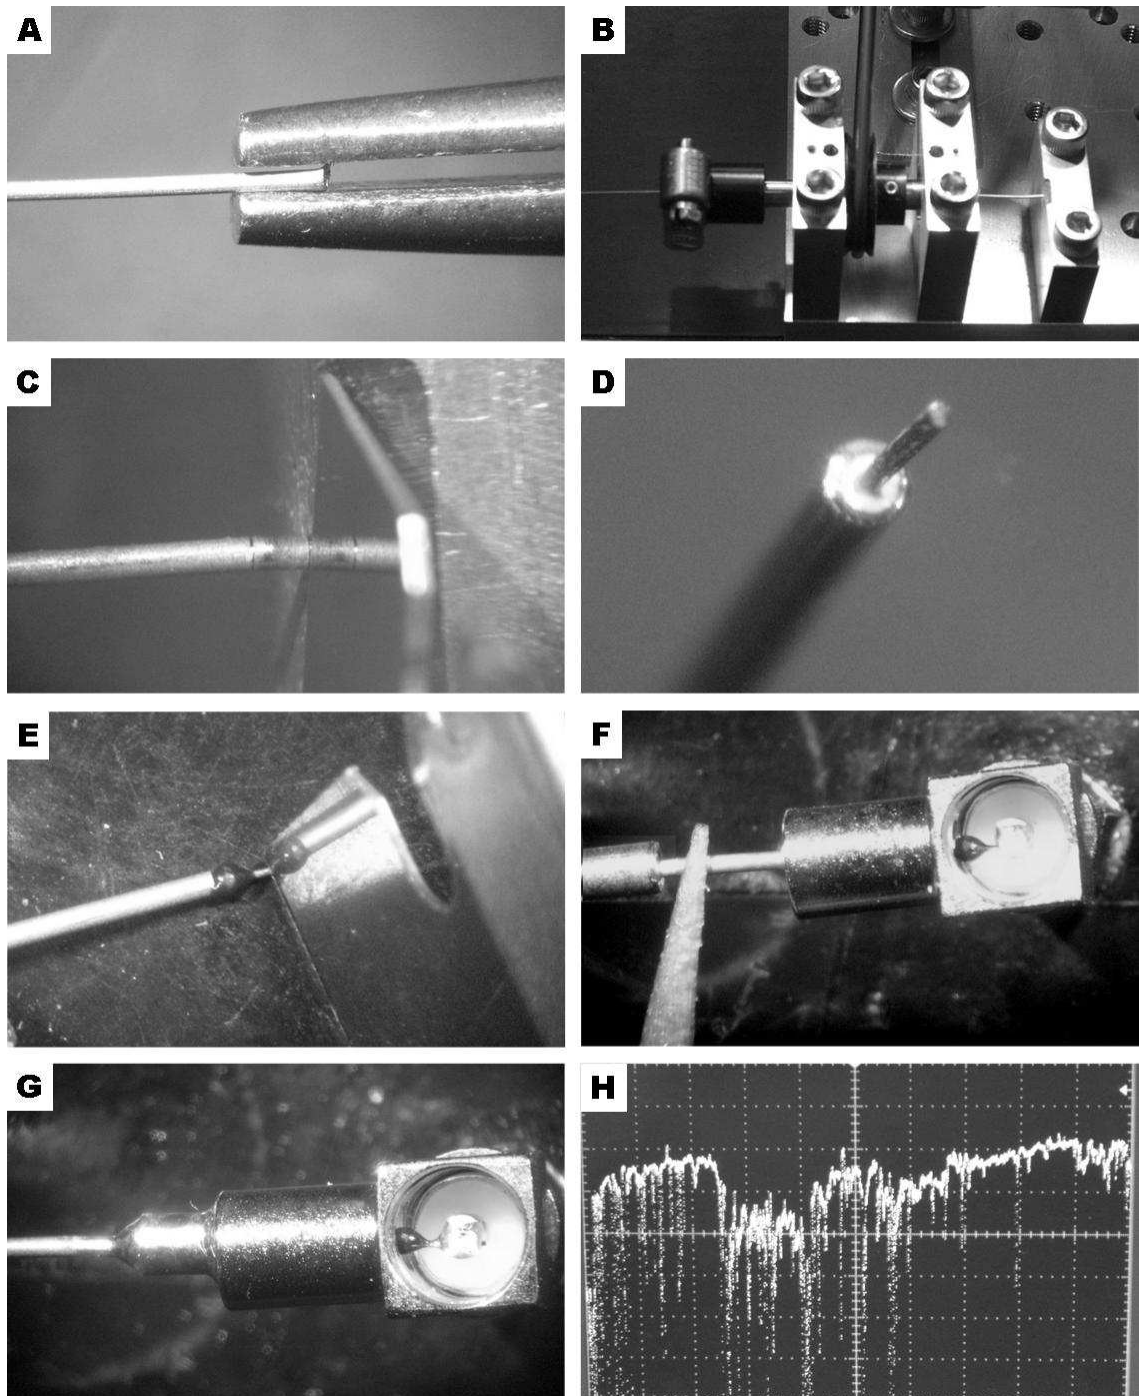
Steps in cutting Thermocoax and attaching connectors. A. Straightening and rounding end with needlenose pliers after cutting to length. B. Inserted into motorized cutting jig. C. Scoring with razor blade. D. Stripped end after breaking off two short sections. E. Scraping center conductor clean after end dipped in epoxy and cured. F. Applying acid flux to SS304 jacket, after center conductor has been soldered to pin. G. Jacket soldered with brass sleeve into connector. H. Noisy leakage current when HV applied, due to water or acid flux. Vertical scale, 100 nA/div., horizontal 2 s/div.
